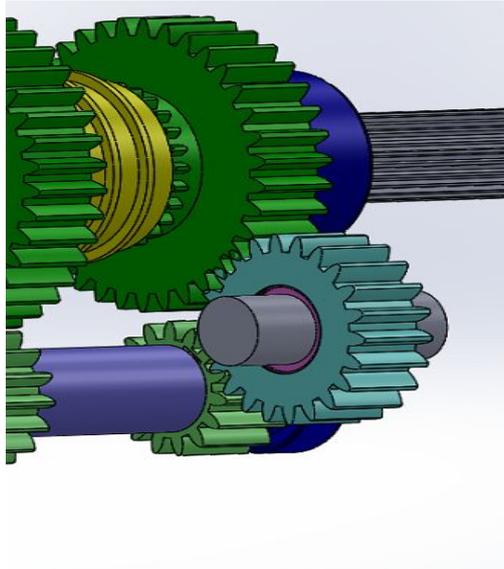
Reverse gears (Drawing by the Solidworks).
